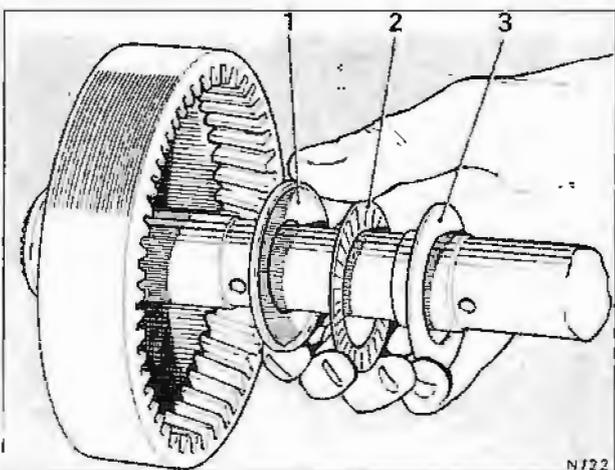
Fitting the races and thrust bearing to the inner face of the rear internal gear
